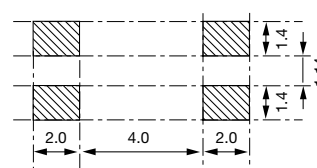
CSM-8B – Recommended Solder Pad Layout Top view
